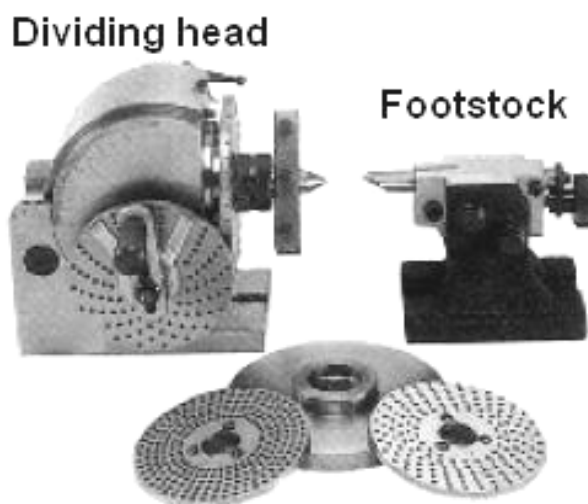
Dividing head and footstock used to index the gear blank in form milling
